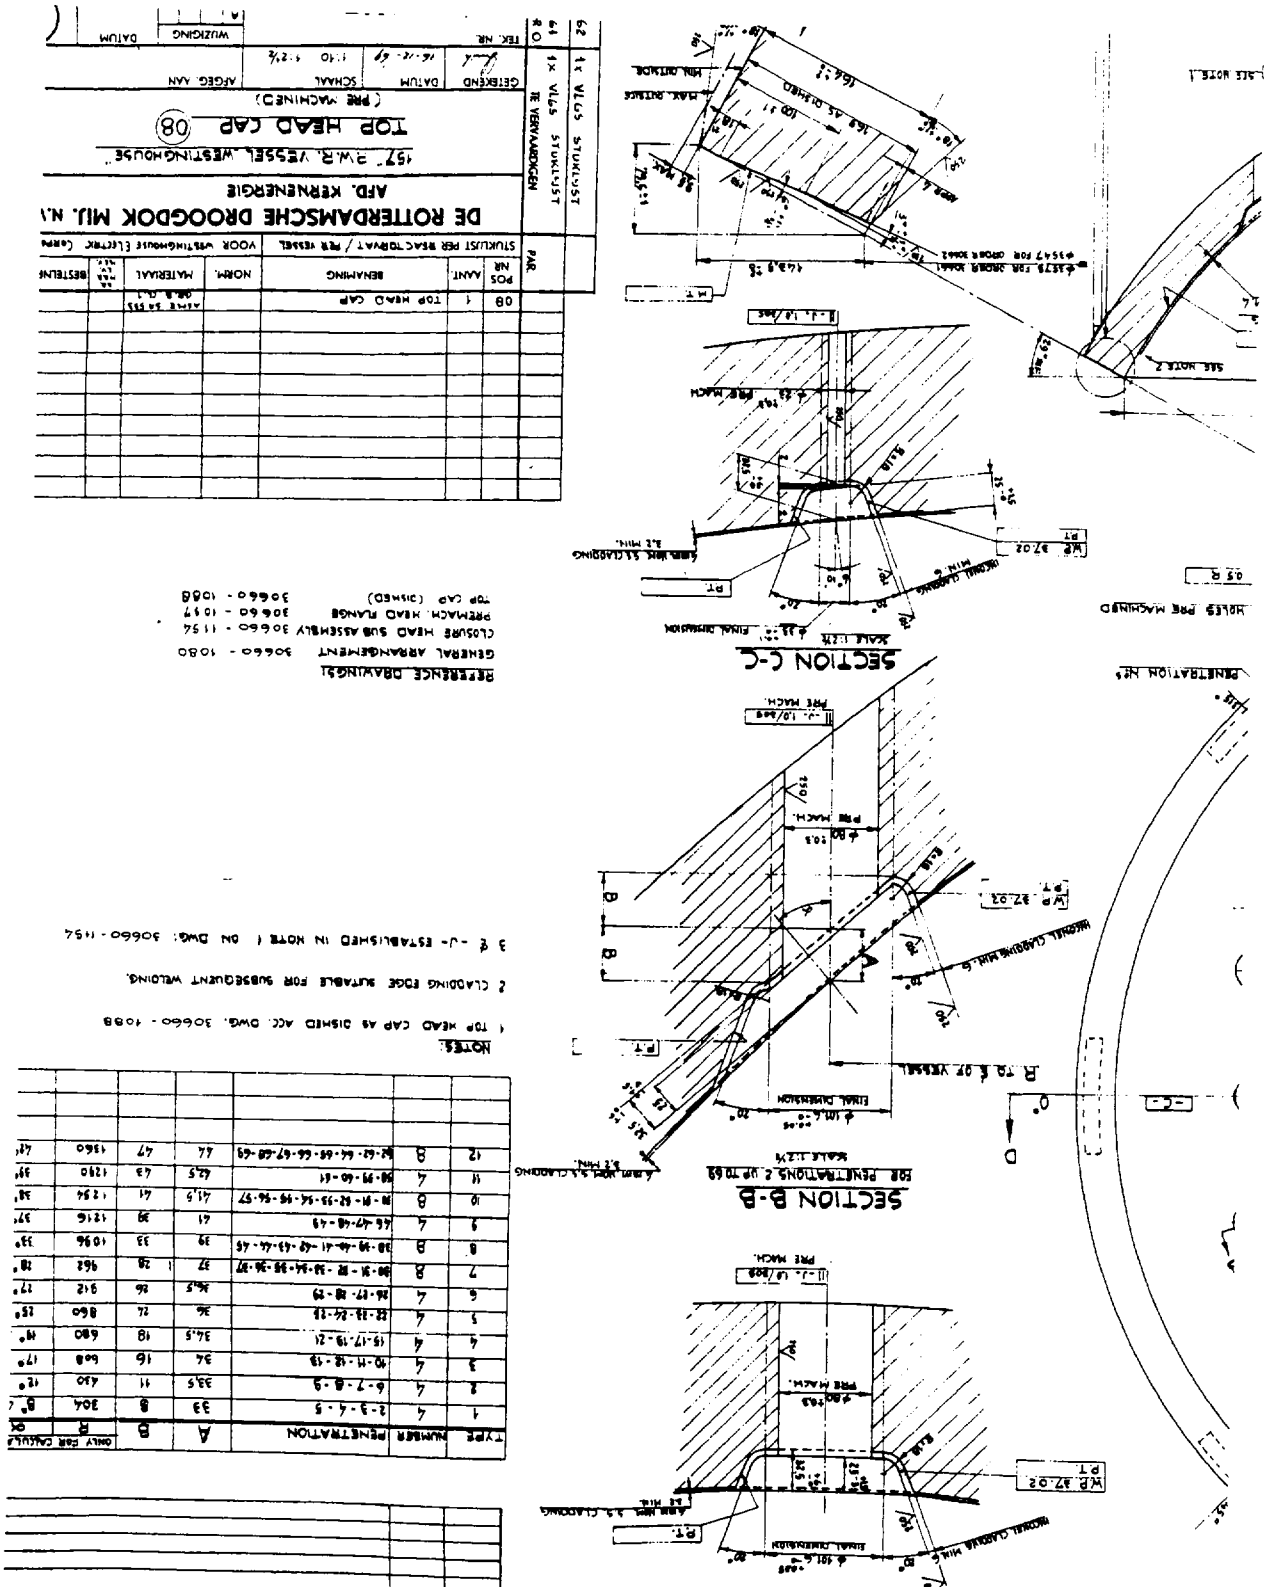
Reactor Vessel Closure Head Showing the CRDM Penetration Layout and J-Groove Weld Geometry
